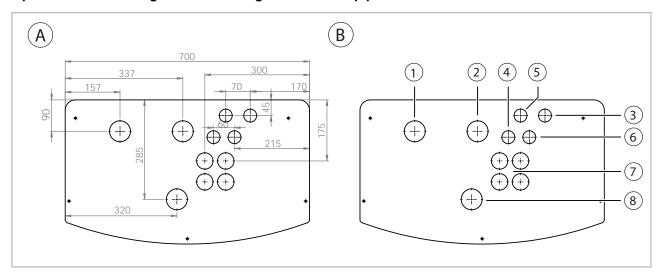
Pipe connection arrangement and designations of pipe connections WKF 130-170 Duo (All dimensions in mm)
